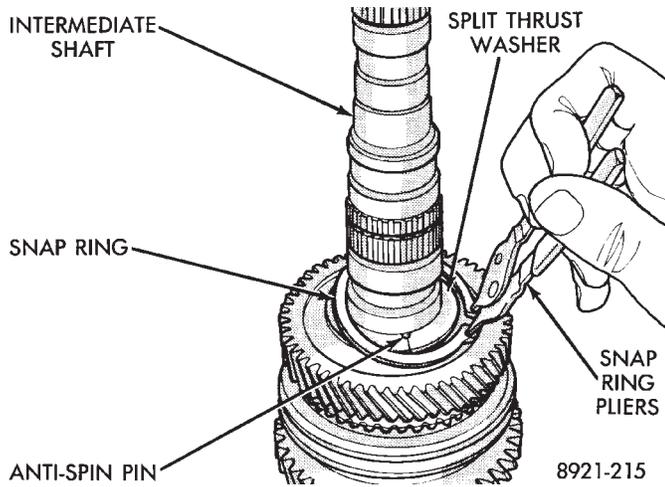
Remove 3-4 Synchronizer Hub and 3rd Speed Gear
